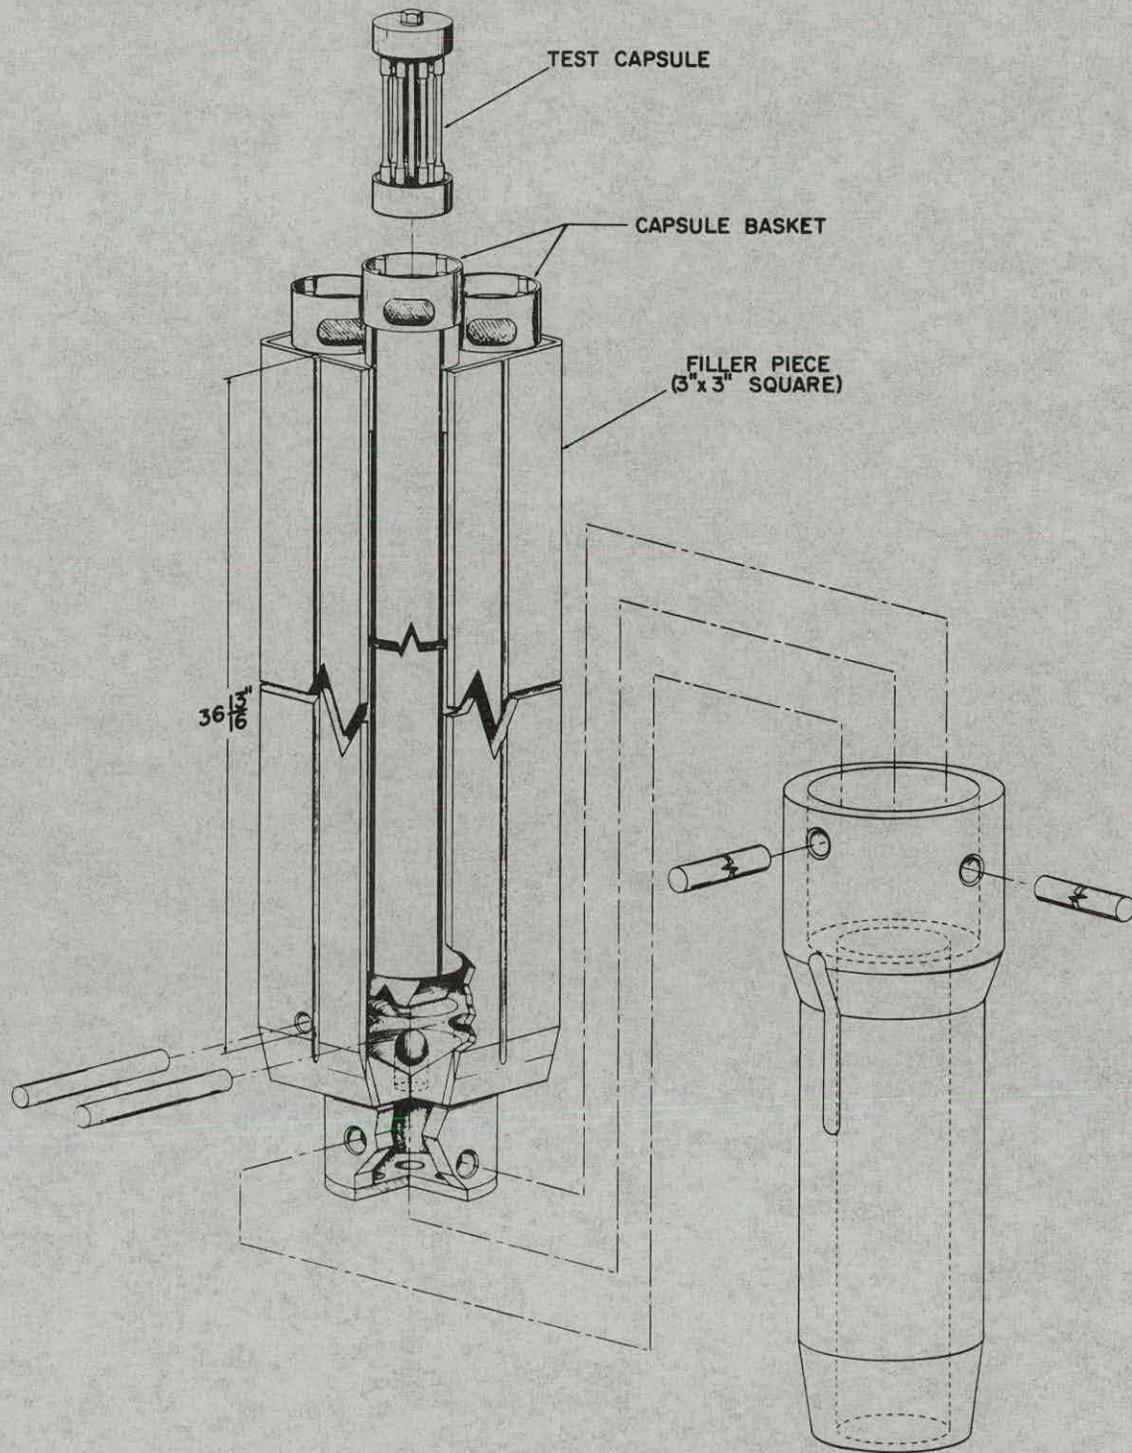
Four-Hole Reactor Filler Piece (D.I. 379)
